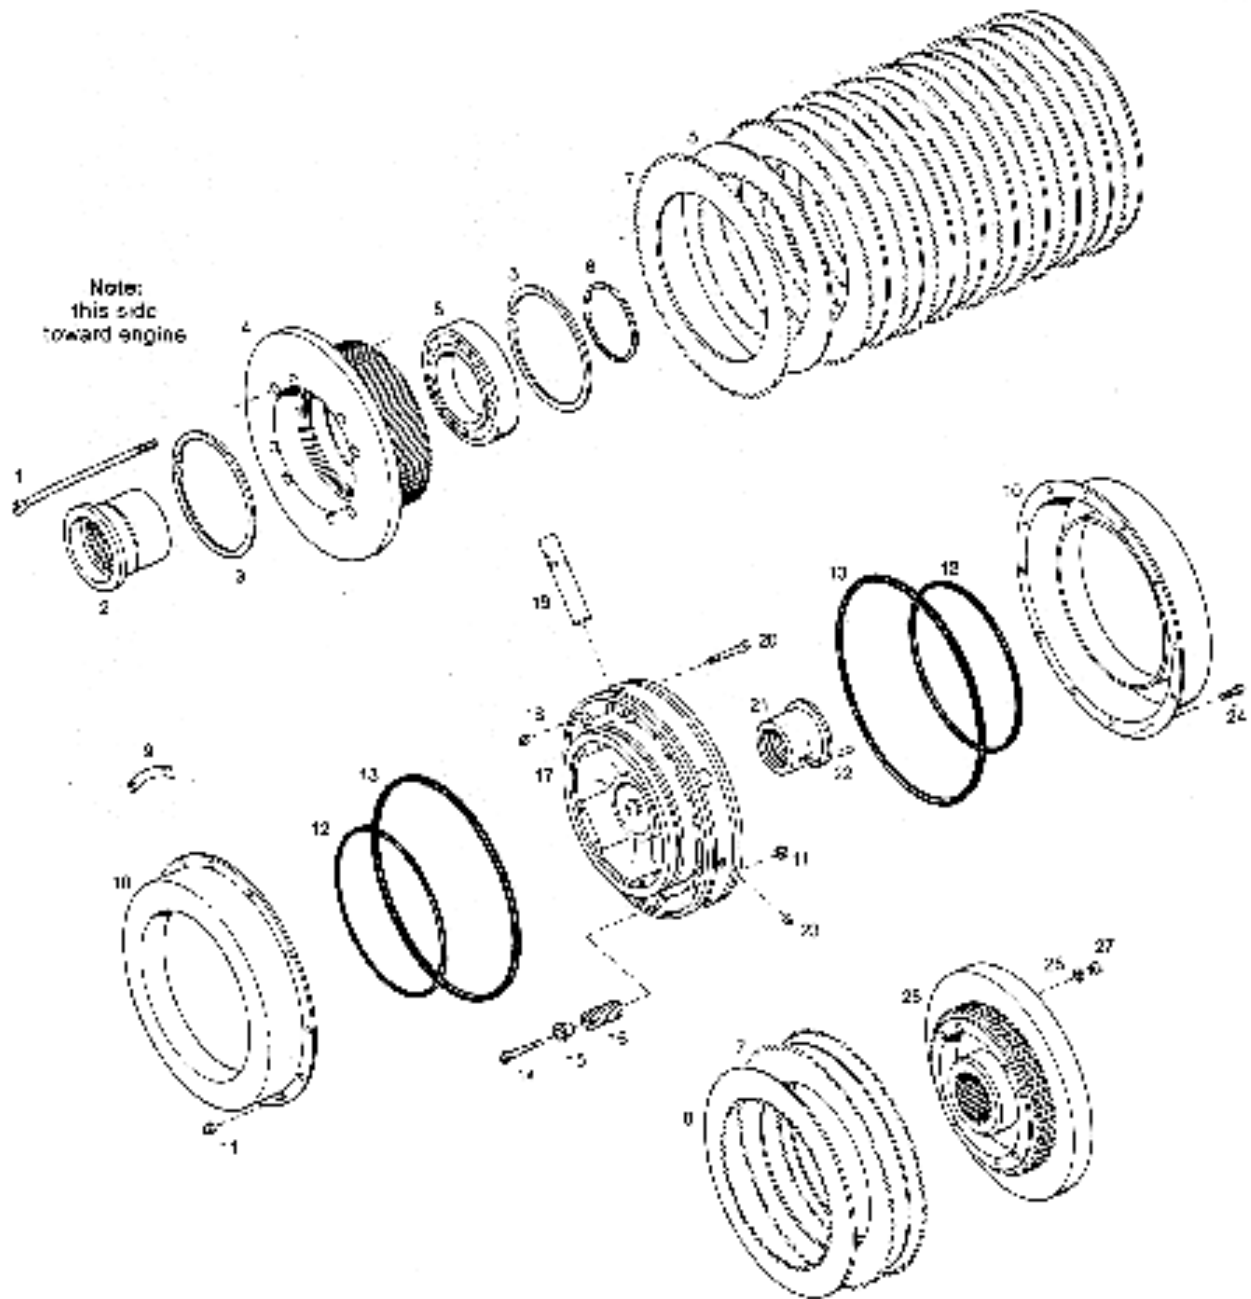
HP 500 Clutch Assembly No. 1-00100-2420
